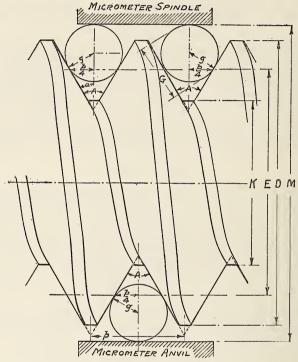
Three-wire method of measuring pitch diameter of thread plug gages.
